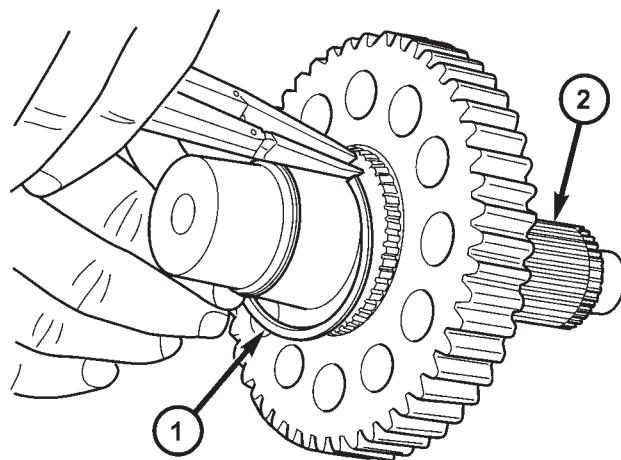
Install Front Output Shaft Drive Gear Snap-ring
